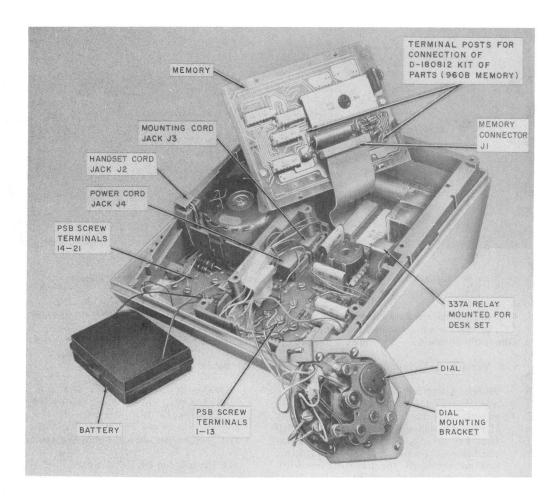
960A01M Chassis and Lower Housing With Dial, Memory, and Battery Laid Aside, and Shield Removed
